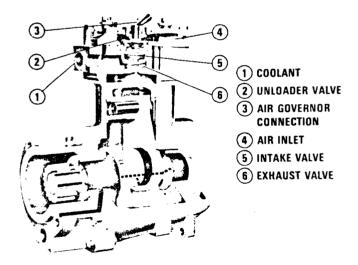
, (AWC-10). Cummins air compressor (single cylinder)
